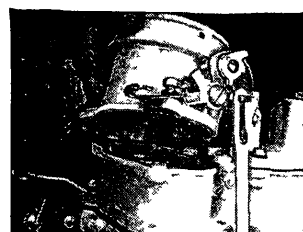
Remove air horn with all parts attached. Attaching screw in air horn beneath choke valve must be removed
